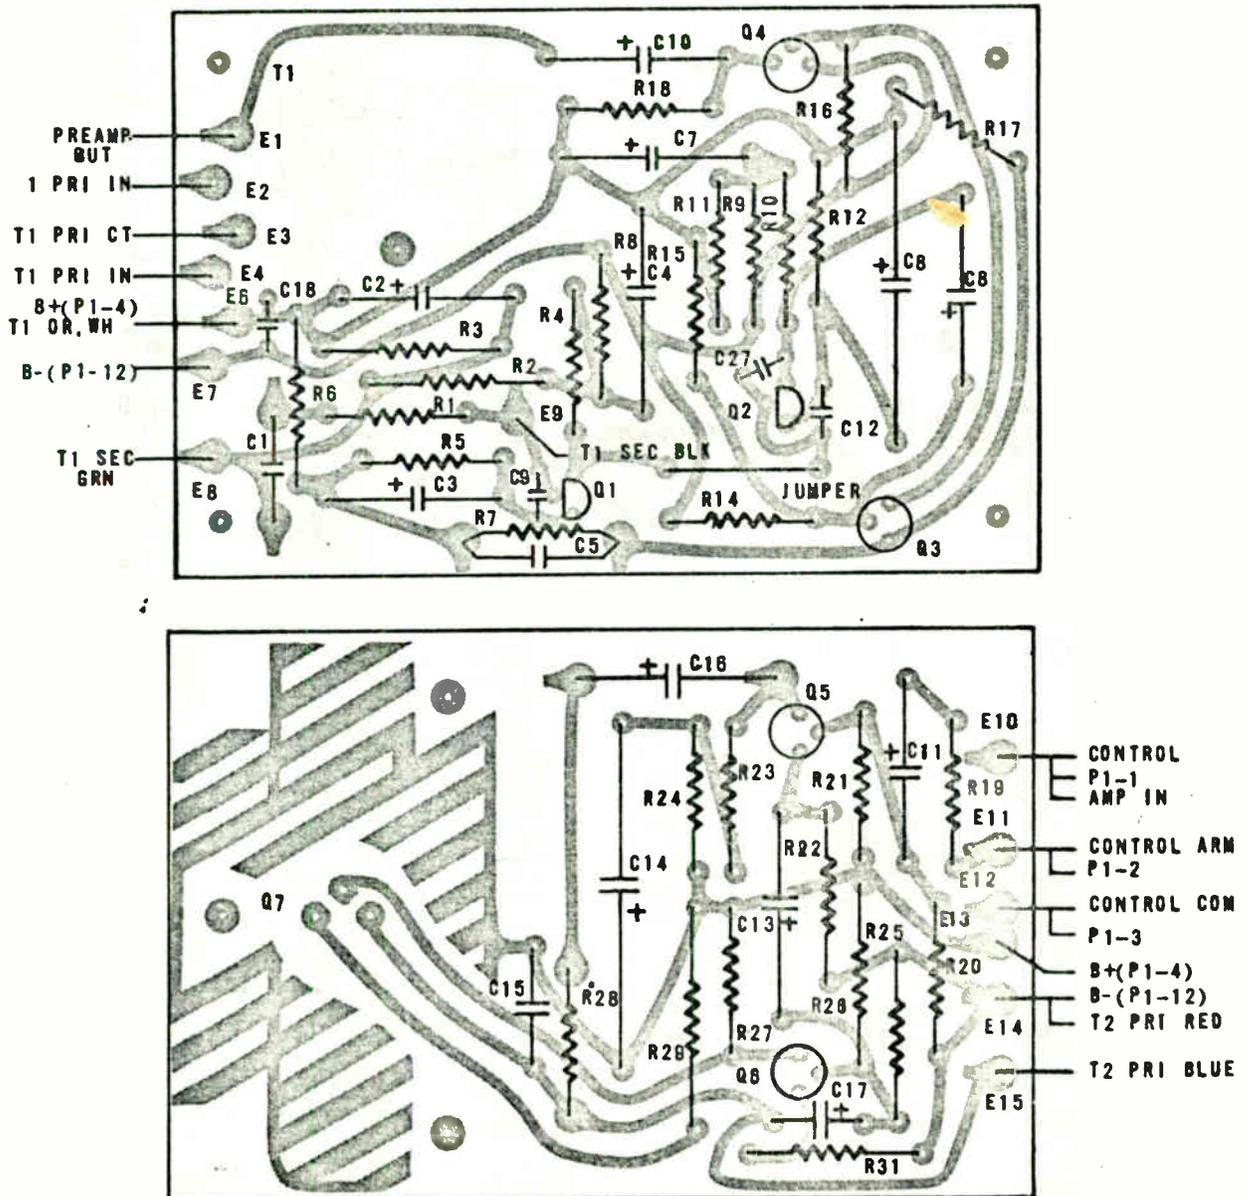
Printed Board Component Location, Viewed from Wiring Side.
